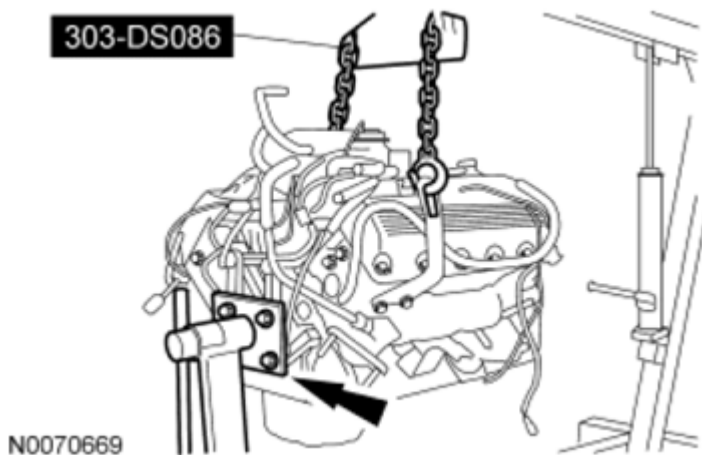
Identifying Engine Lifting Bracket (303-D087)
